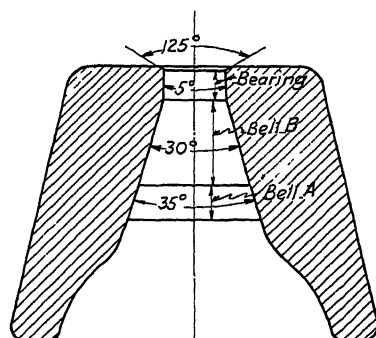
DIE WITH 30° BELL AND A BEARING, WHICH WILL NOT PRODUCE CHECK MARKS WHEN DIE IS NEW.
